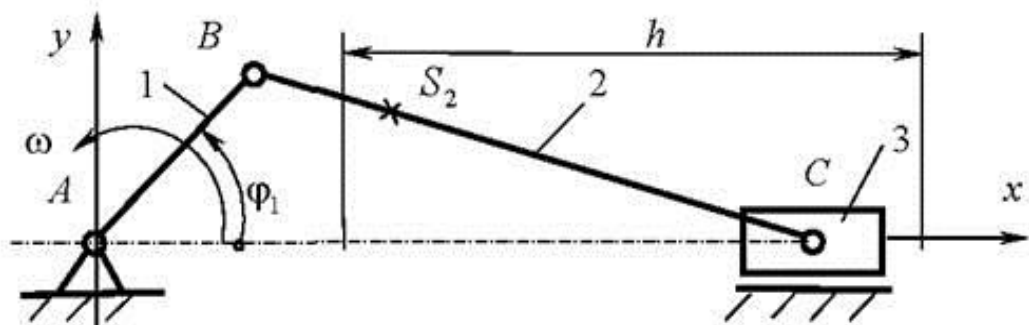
Kinematic scheme of the horizontal – forging machines.
